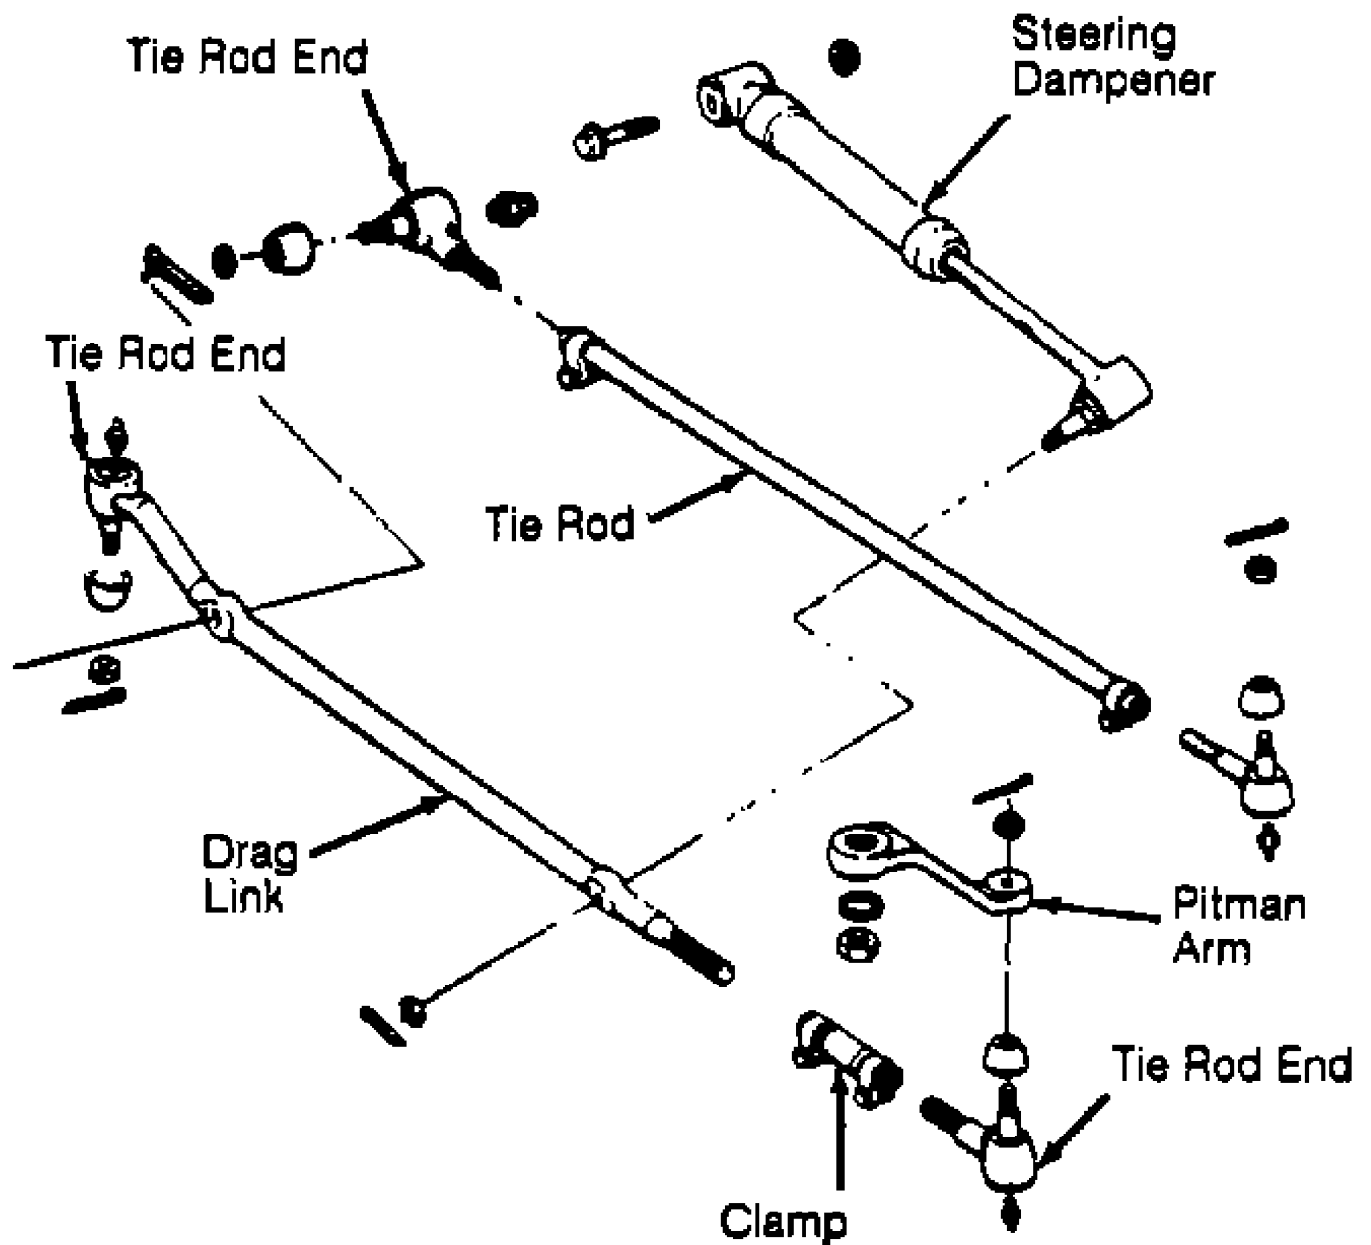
Exploded View Of Steering Linkage (Except Wrangler)
